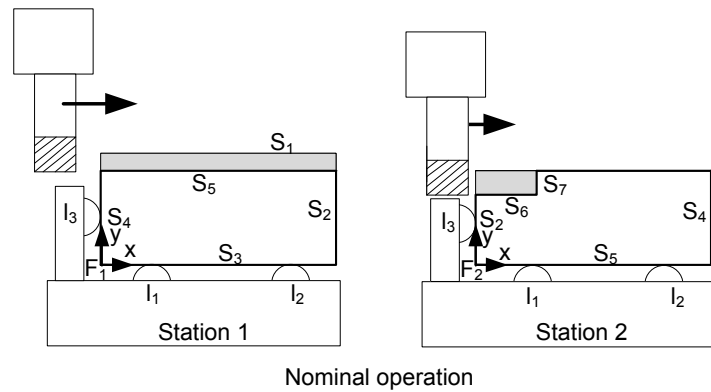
SoV example. Multi-station machining process used in the 2D case study.
